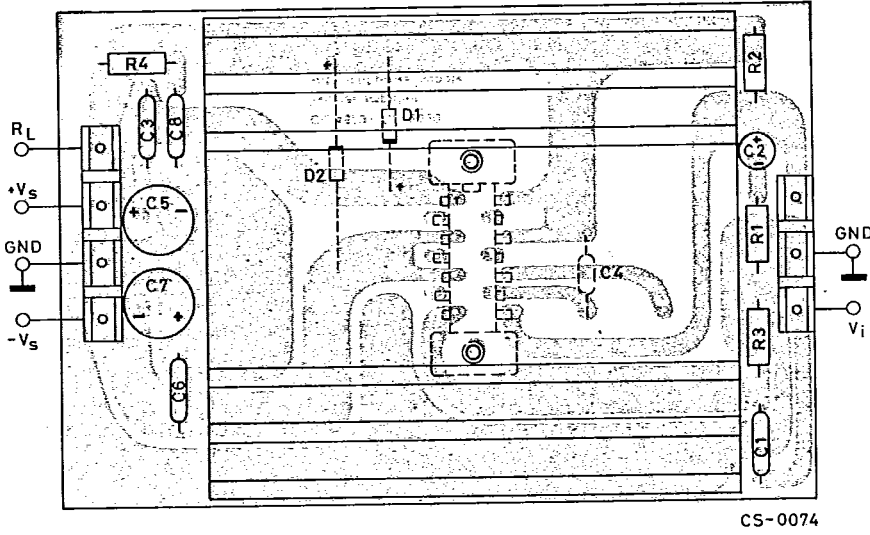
P.C. Board and component layout for the circuit of fig. 16 (1:1 scale)
